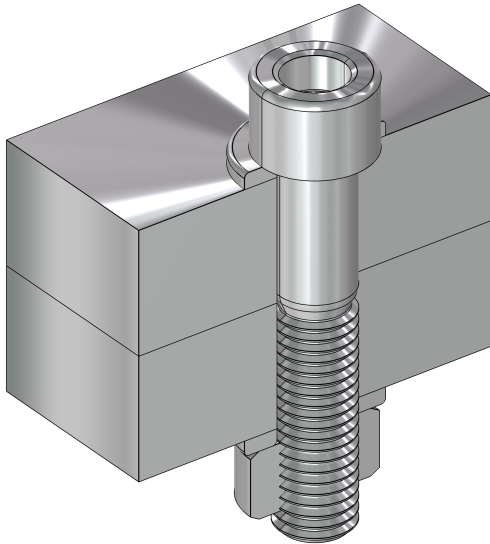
3D – CAD – assembly as a basis for the simulation (system in halved view to be able to see the screw)
